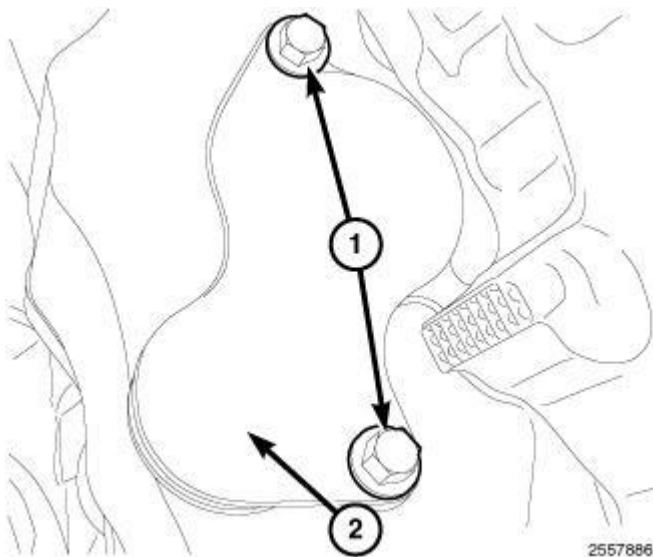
Identifying Bolts & Bell Housing Access Cover
